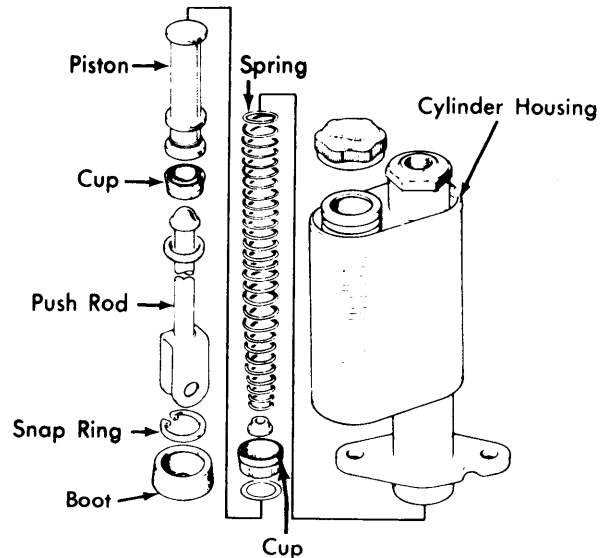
Exploded View of Clutch Master Cylinder Assembly
